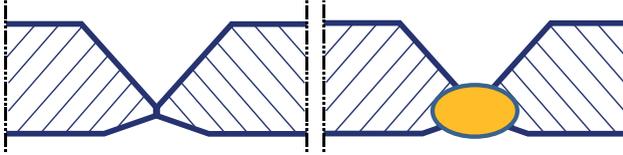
Special case of a successfully welded tube/elbow assembly with $\frac{1}{2}$ V-preparation on both extremities
